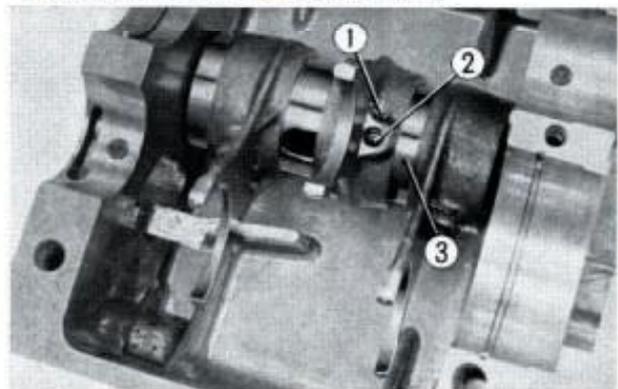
① Guide pin clip ② Guide pin ③ Gear shift drum
